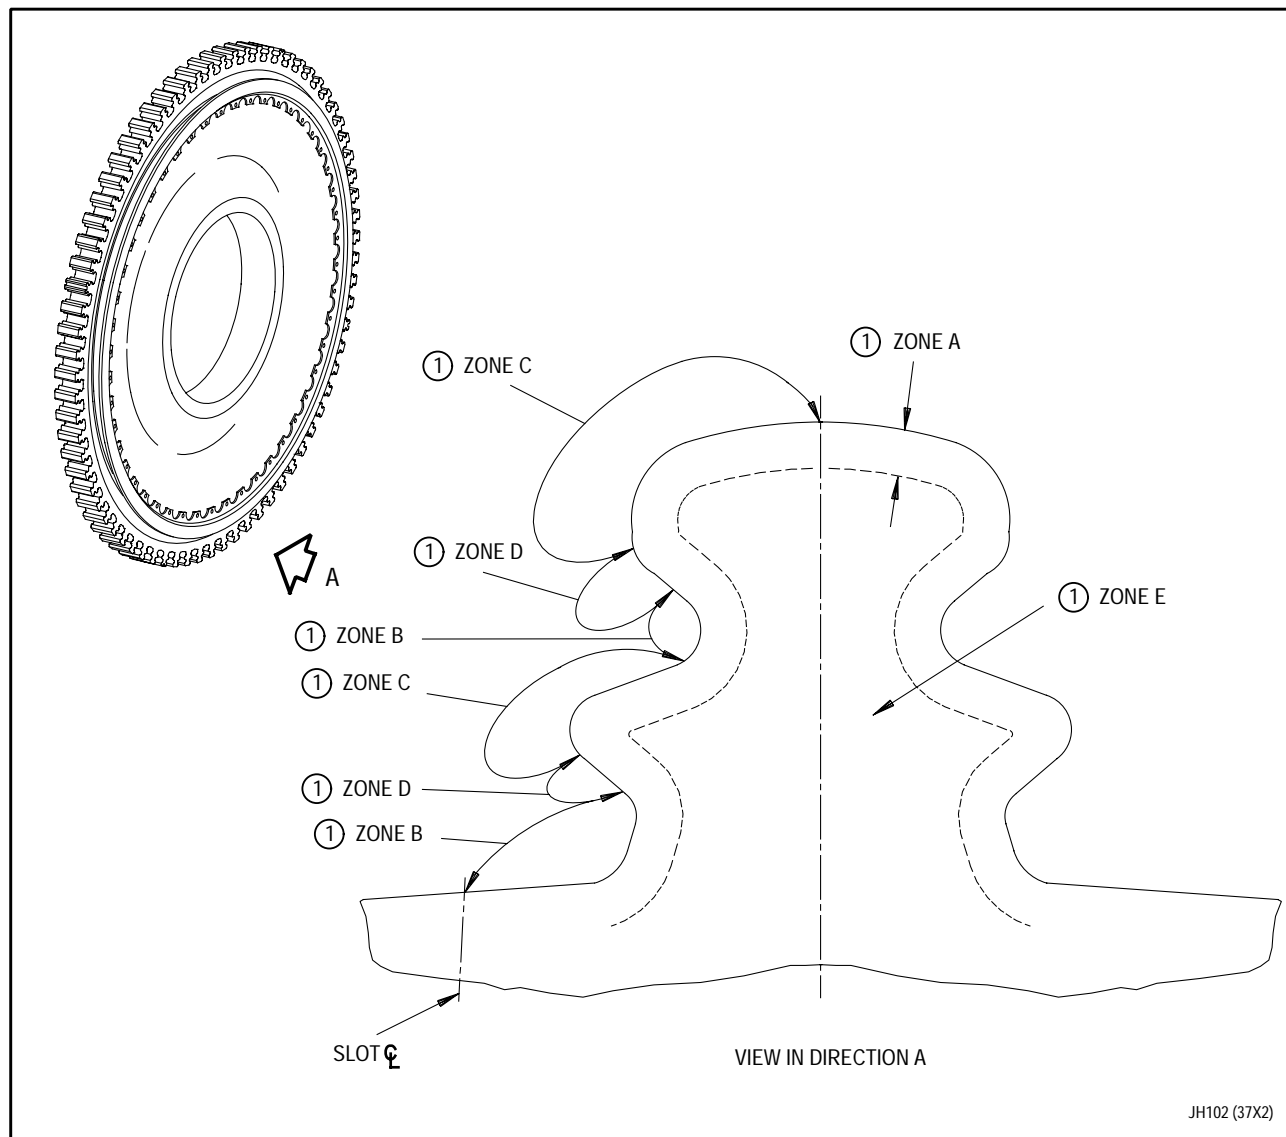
Second Stage Turbine Disk - Inspection (Sheet 3 of 3)
